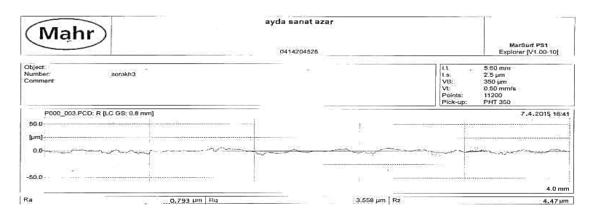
Surface roughness profile of the first hole (drilled with 0.04 (mm/rev) feed rate, 500 (rpm) spindle rotation speed, and cutting fluid containing 90 μm alumina particles).
